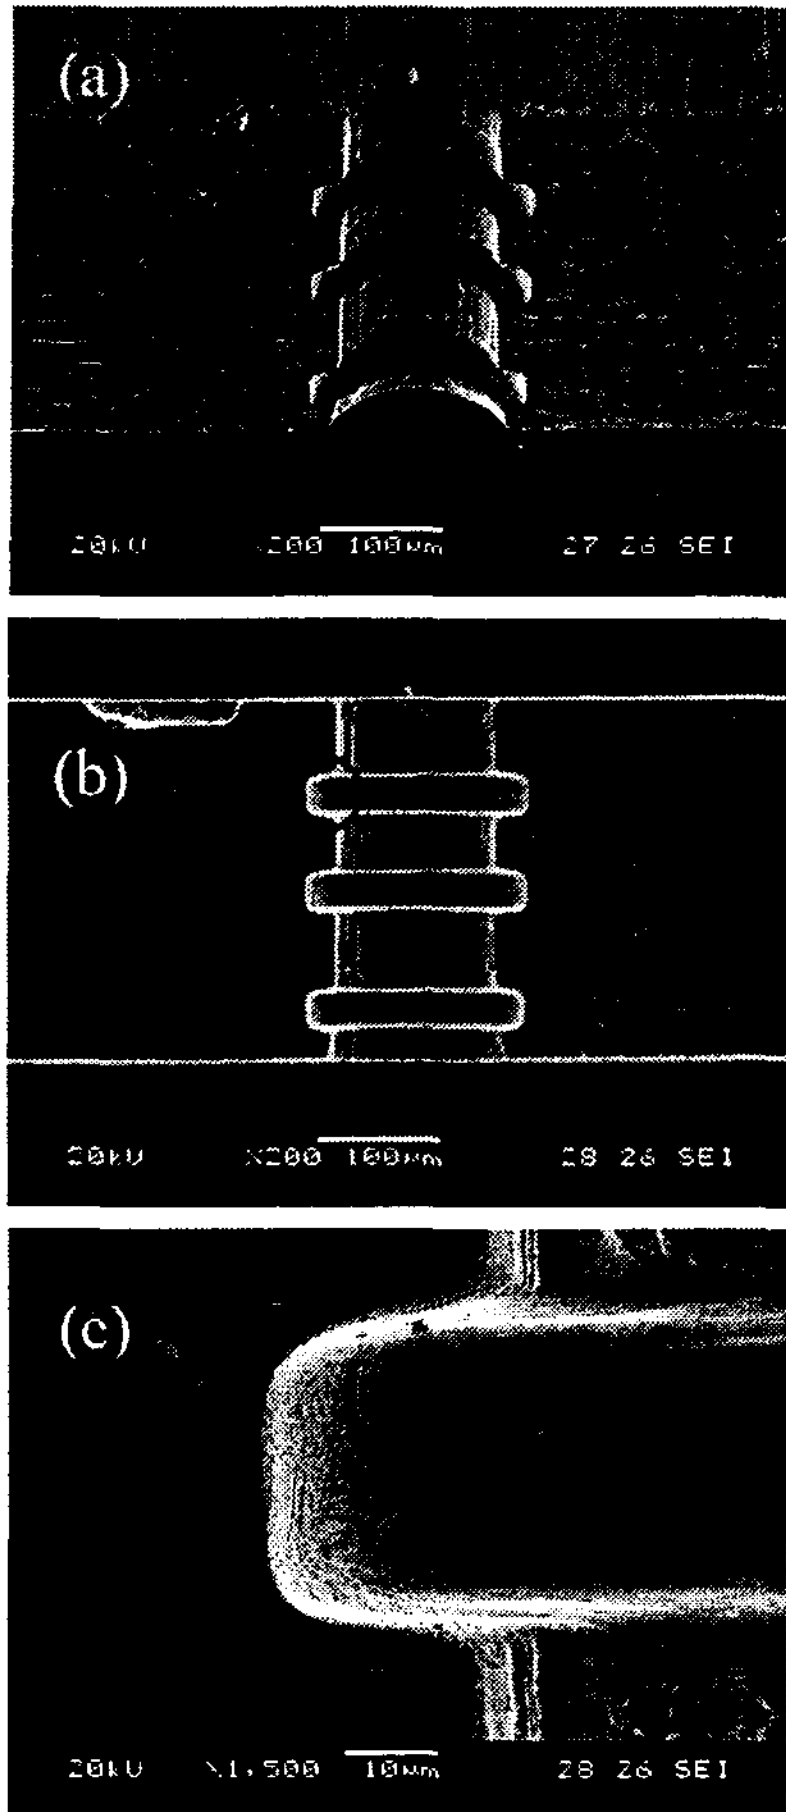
Sectional view of groove array in the micro hole: (a), (b) groove array, (c) enlarged view of marked area in (b)
